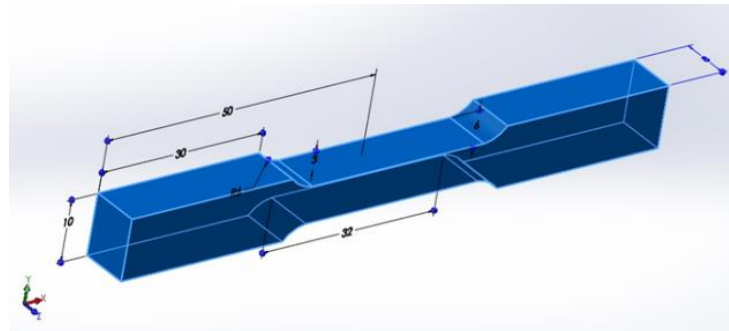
A 3D tensile specimen model created in Solidworks 16.0
